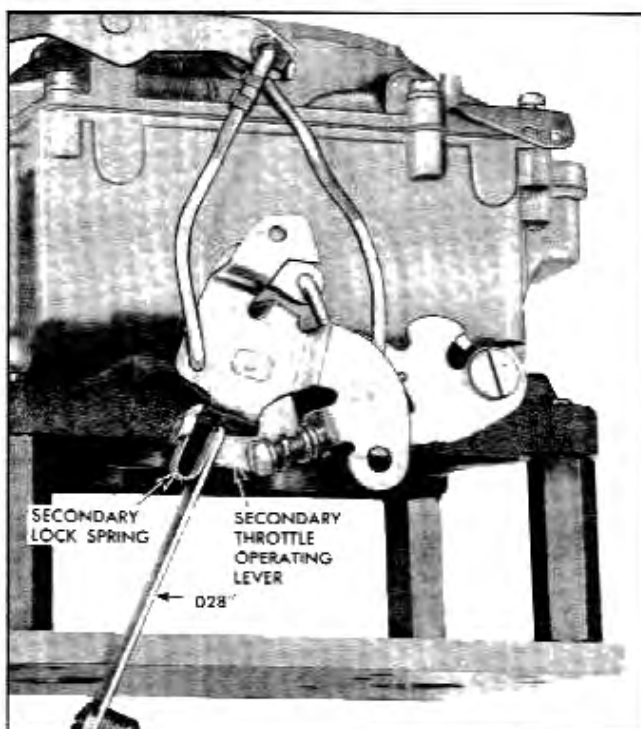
B-36 Secondary Throttle Lever Adjustment (Carburetor Removed for Photographic Purposes Only)
